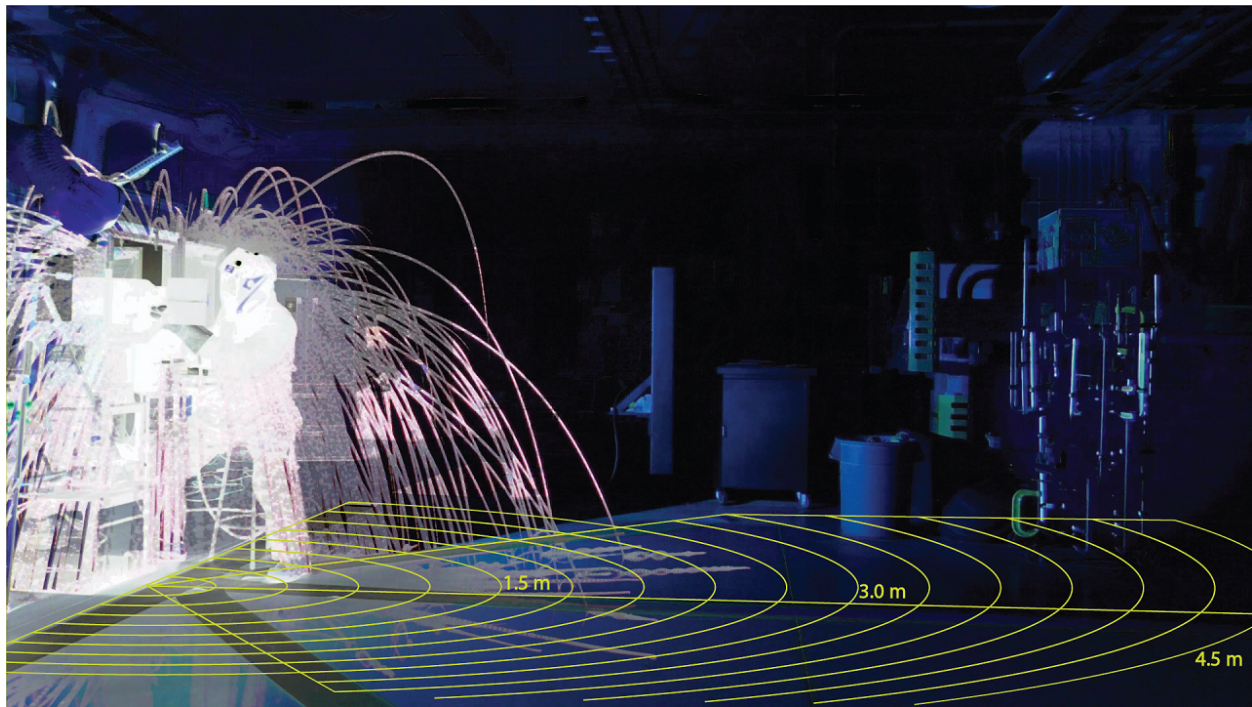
Gas Metal Arc Welding: Nominal
